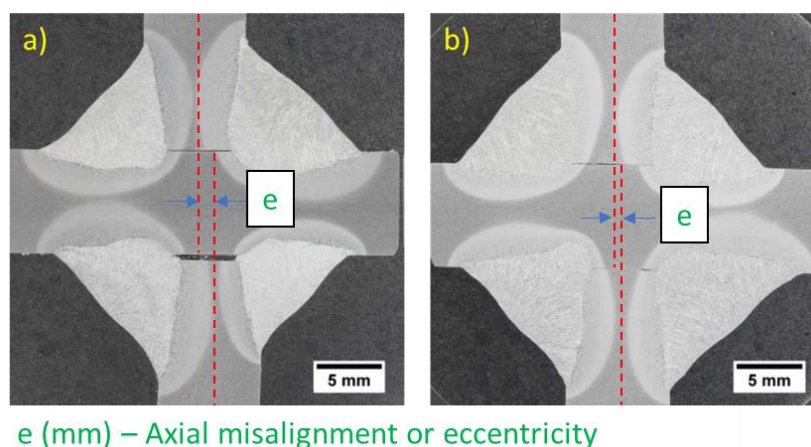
Cross-section of the welded joints and the magnitude of axial misalignment - a) metal-core electrode manual (MM); b) solid-core electrode manual (SM). Taken from [9].
